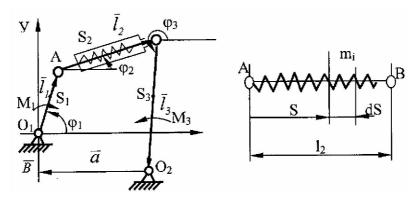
The mechanism of 4-part machine with elastic connecting-rod
